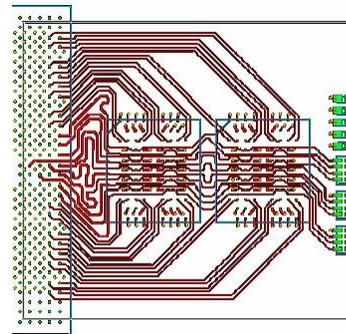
An example layout of one 4-byte XDR memory channel of the Cell BE processor in a 4-layer PCB.
